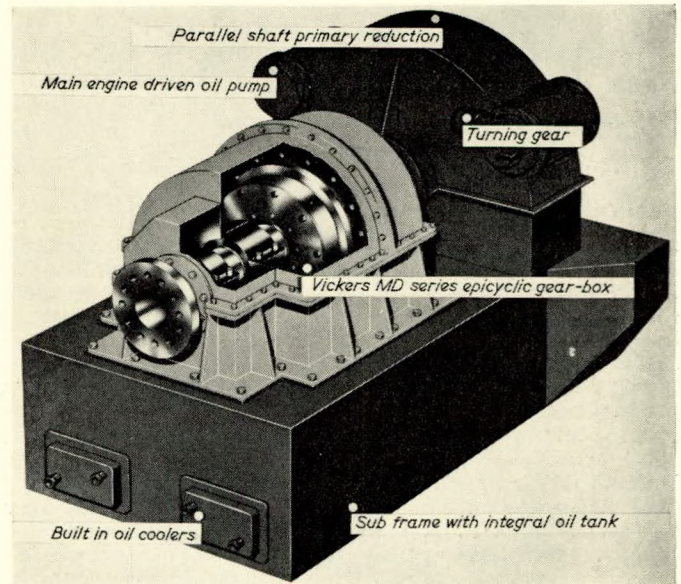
Vickers standard final stage planetary gear combined with parallel shaft primary gears for conventional cross-compound steam turbine installation
